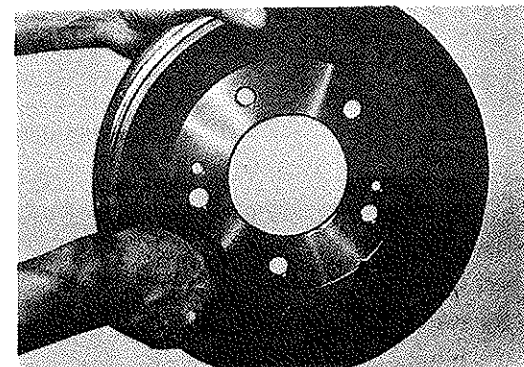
Checking Brake Shoe-to-Drum Contact
